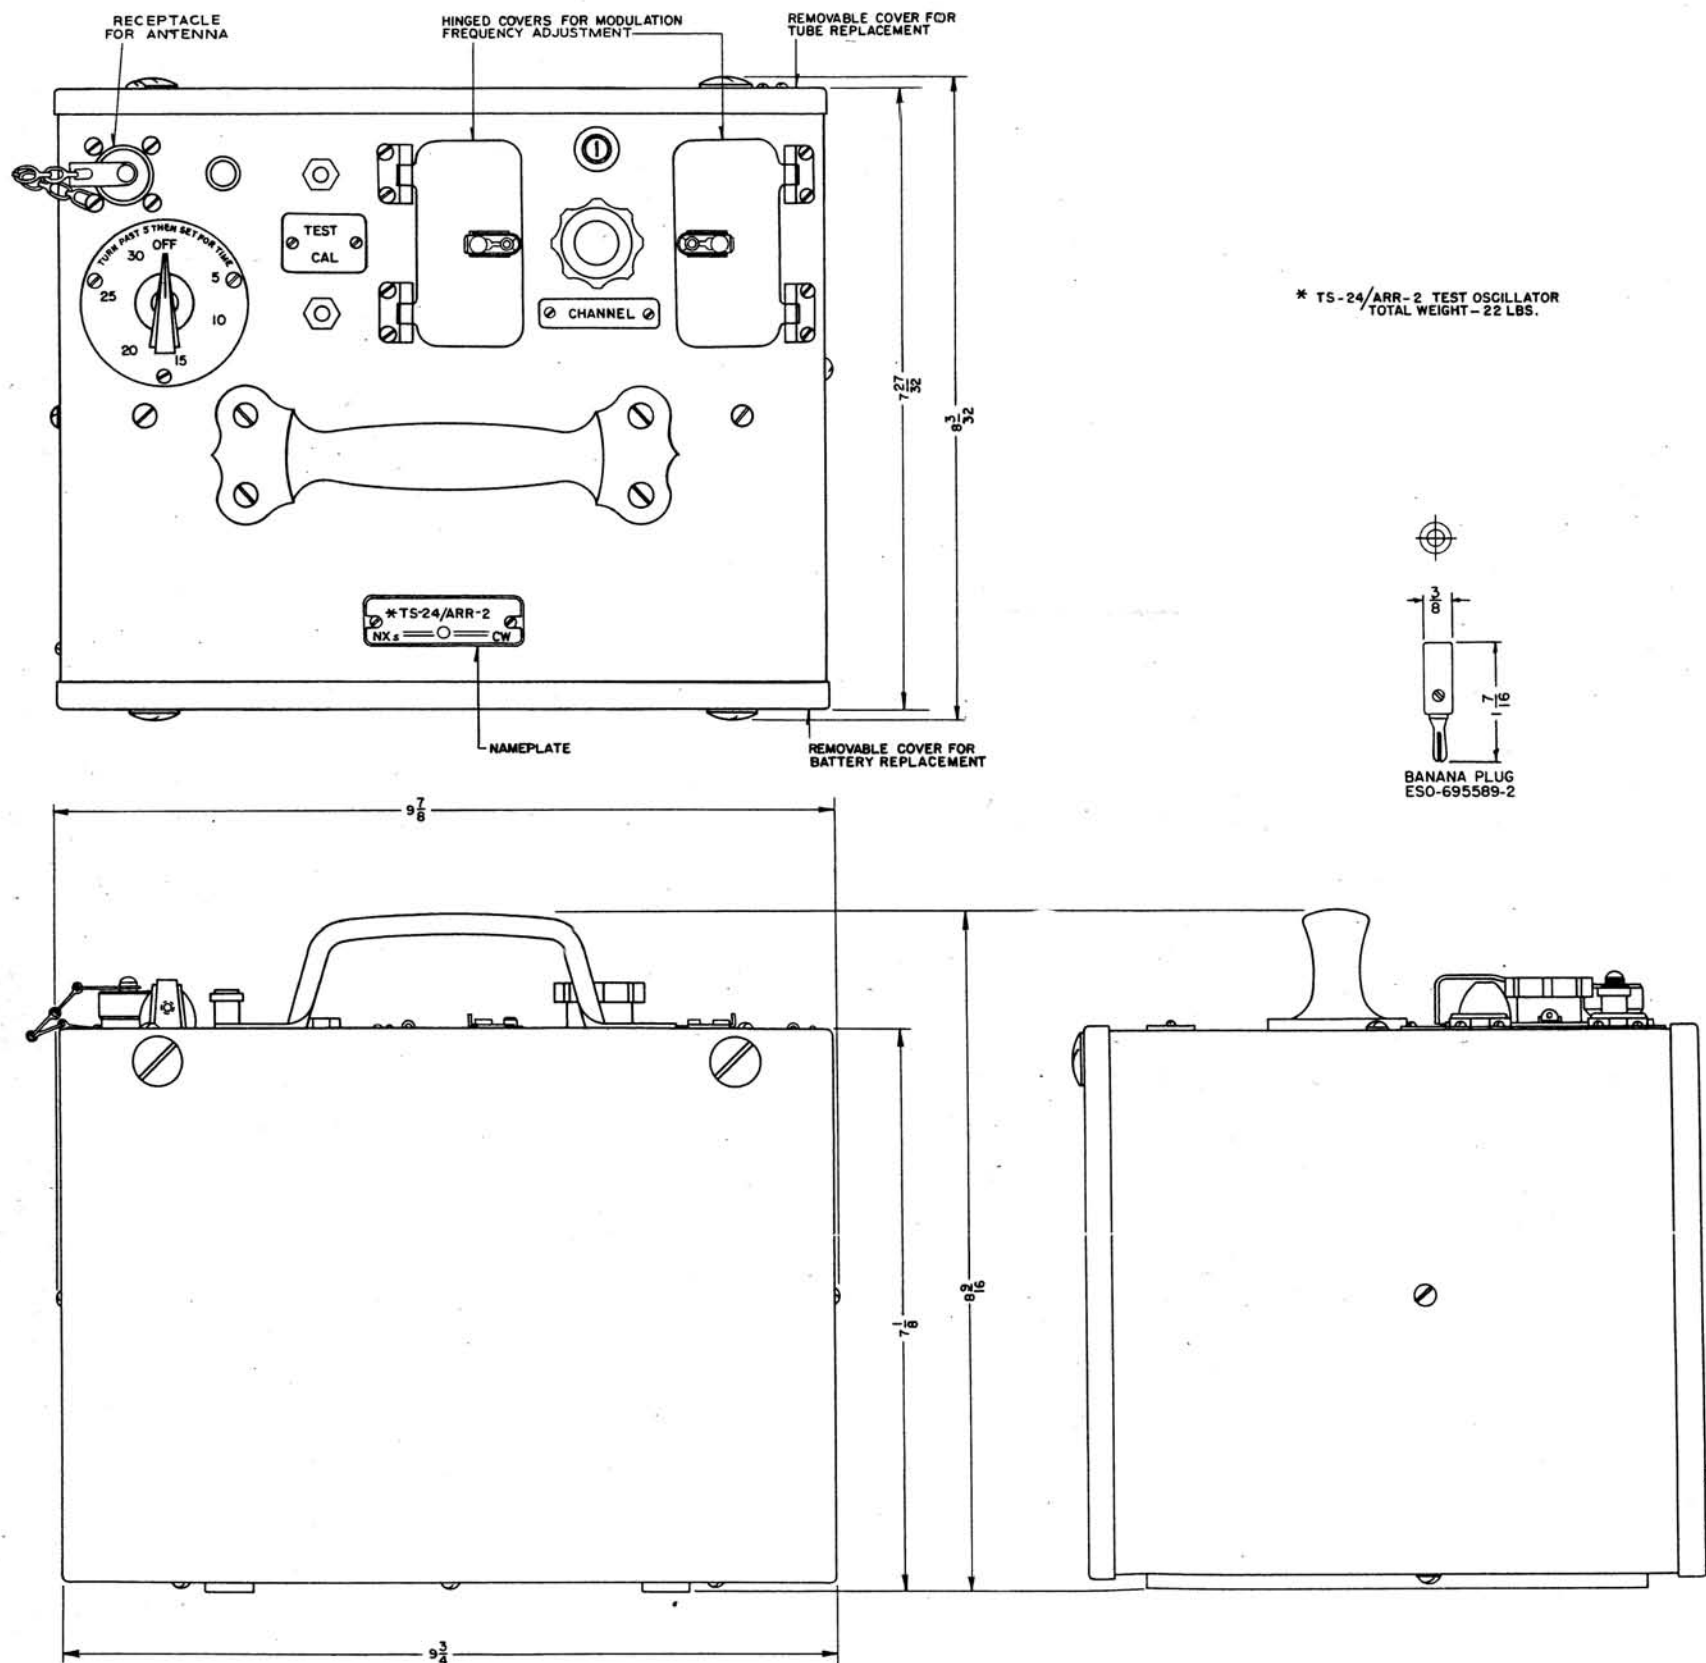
Outline Dimensional Drawing of Portable Test Oscillator *TS-24/ARR-2
